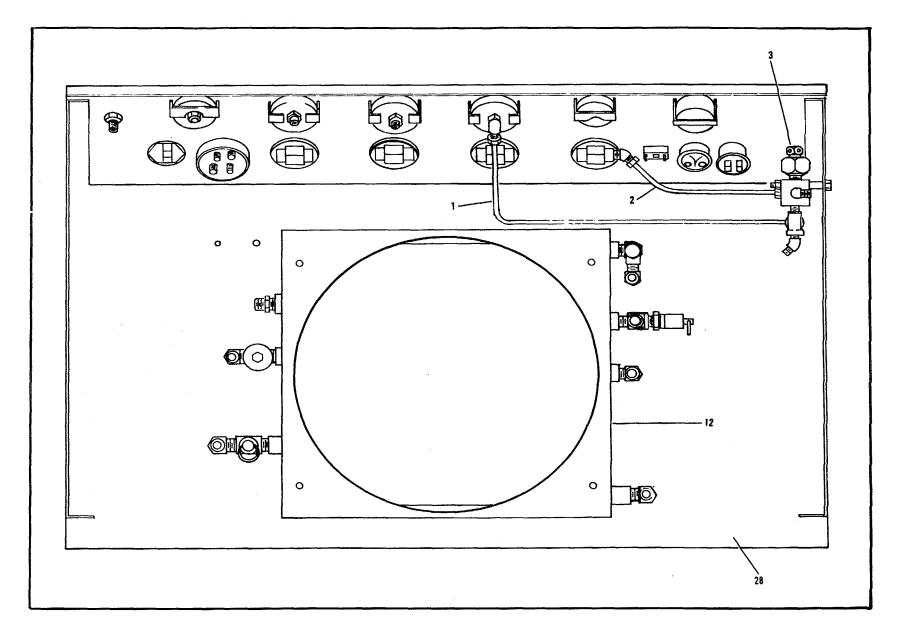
Control Panel Assembly (Sheet 1 of 2)
